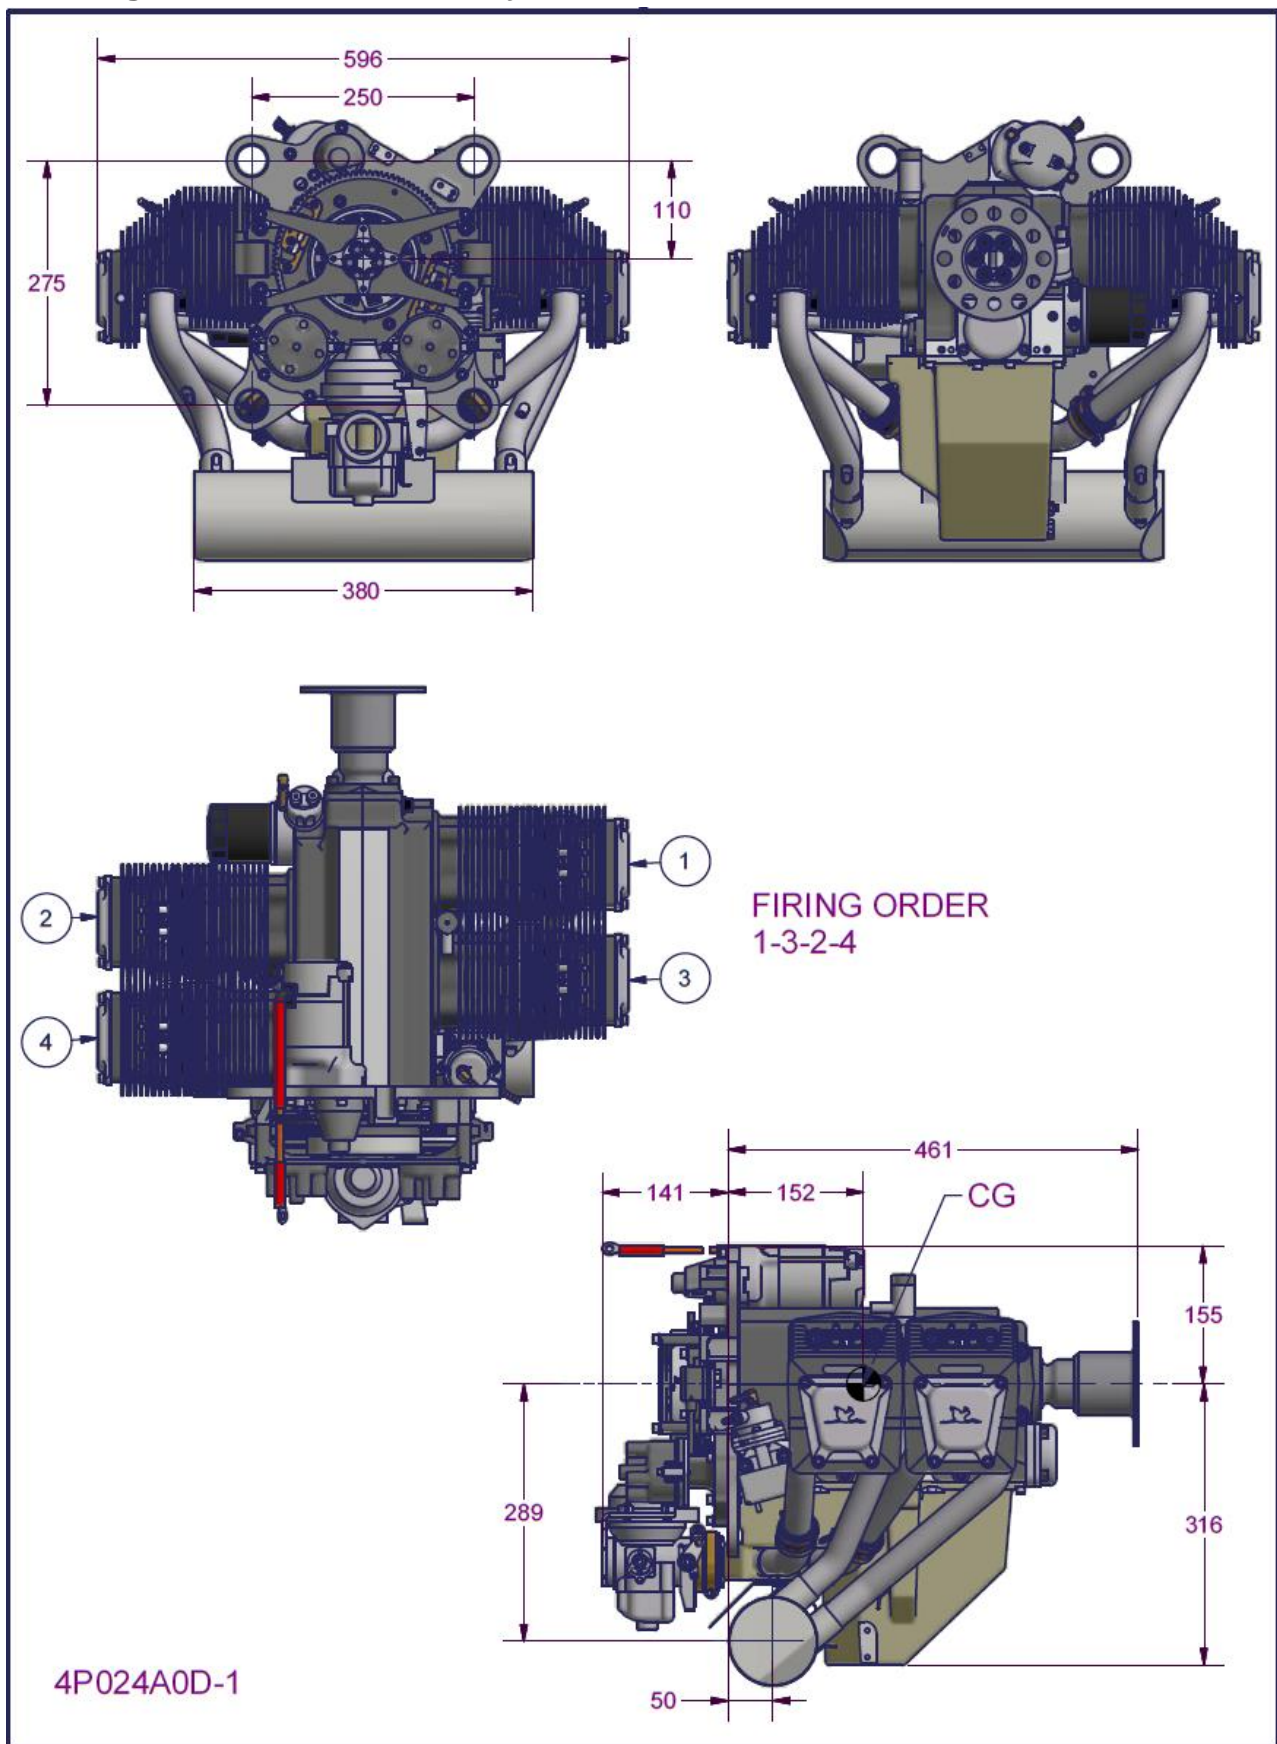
2200 Gen 4 Engine dimensions and layout
